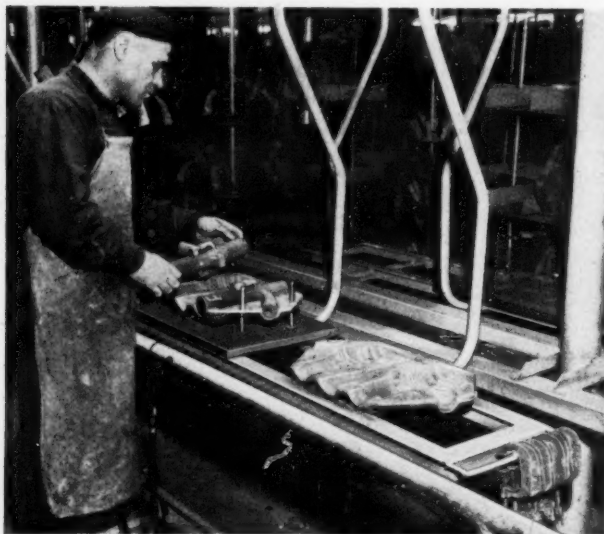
At the Mould-closing Station, to which the Mould Shells are Carried on the Conveyor Shown, Cores Taken from Another Conveyor Hanger are First Placed in Position in the Left-hand Shell
